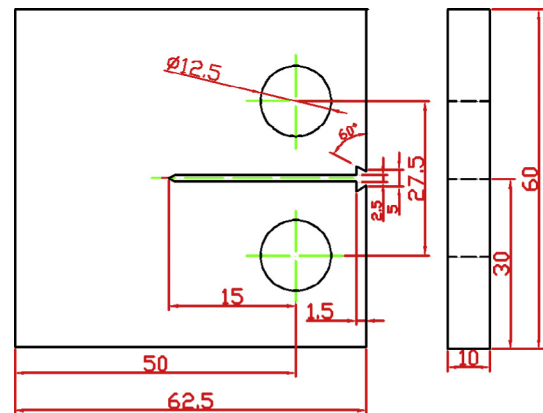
Dimensional details of the fatigue sample (dimensions in mm).
